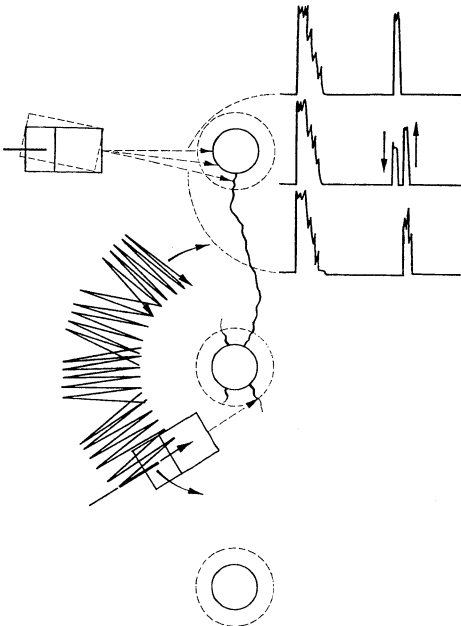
Testing rivet holes, swing-motion of the probe and indication on the CR screen of an incipient crack in a rivet hole
